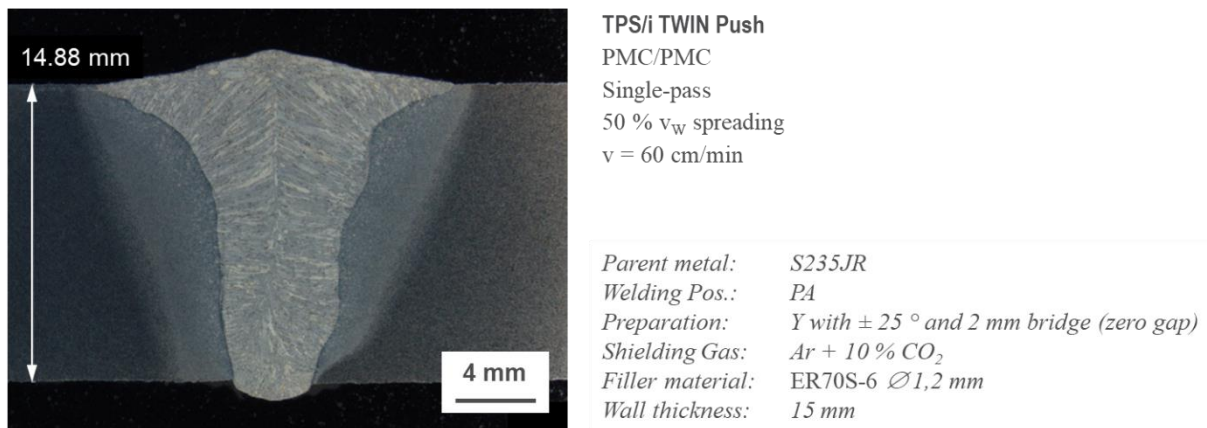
Butt joint of 15 mm thick mild steel plates welded with PMC/PMC TWIN Push in single-pass at a welding speed of 60 cm/min using a wire feed speed spreading of $v_w^r/v_w^l = 50\%$.
